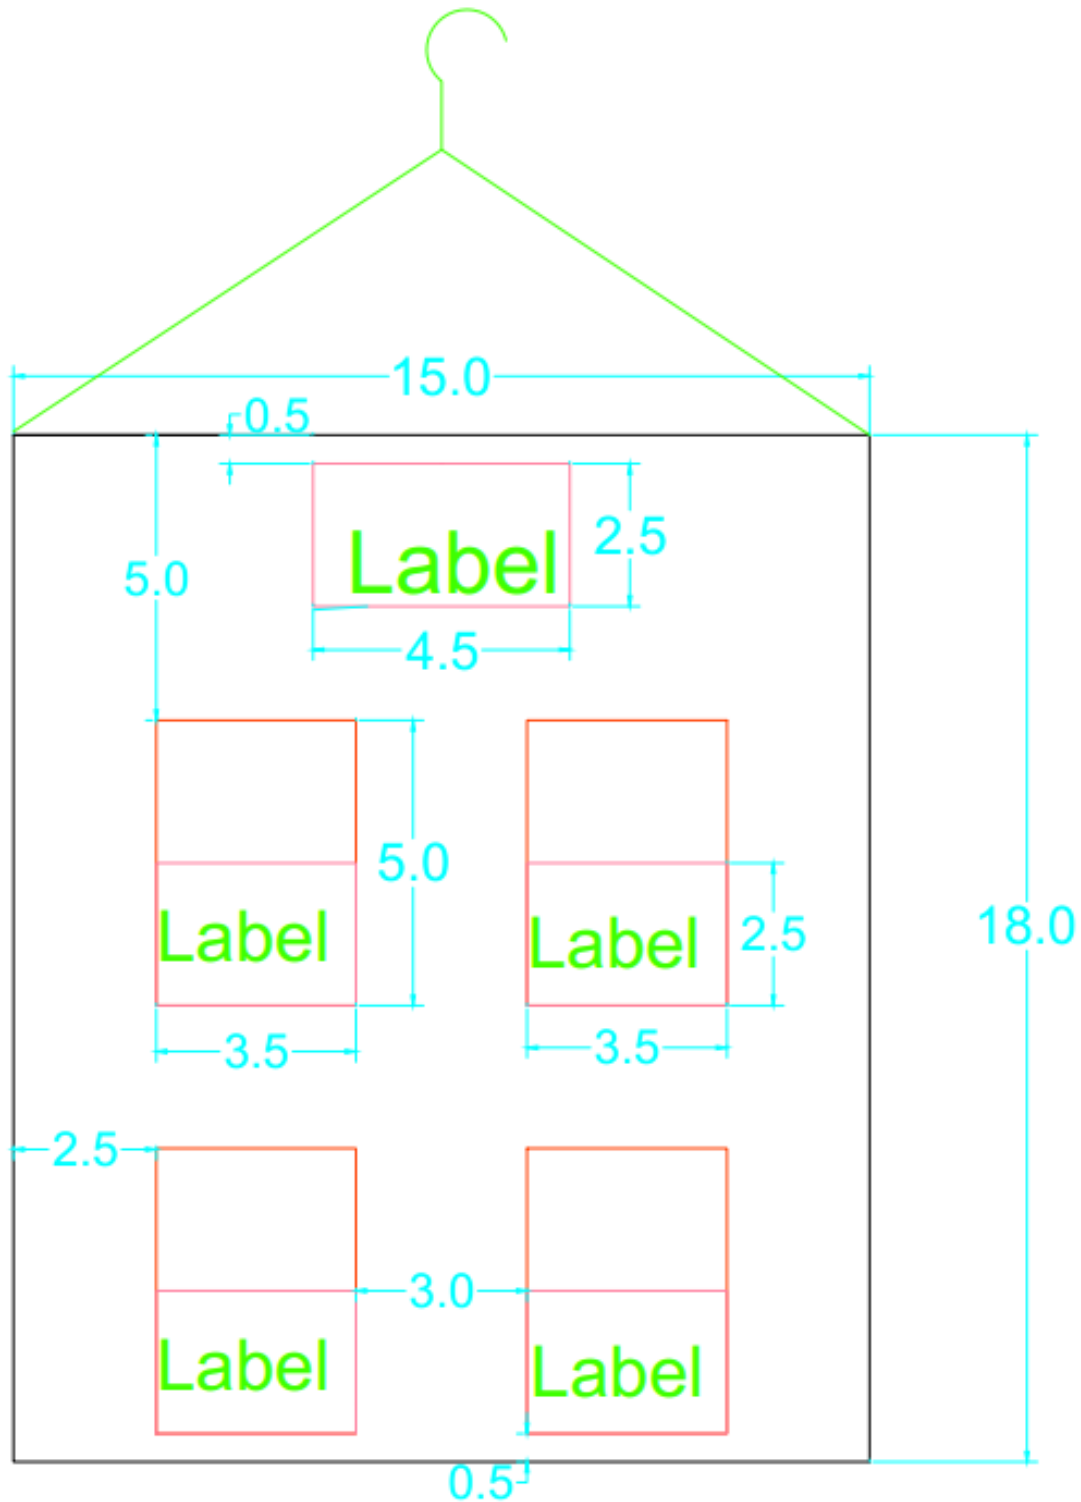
AutoCad Drawing of the Hanging Calculator caddy (by Mackenzie Danies).
